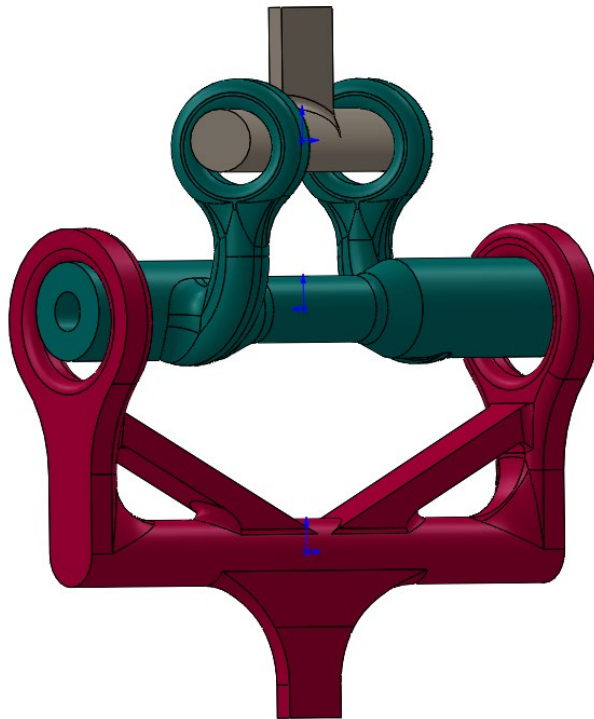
three parts of the second design: upper handle (grey), tube (green) and lower handle (red)
